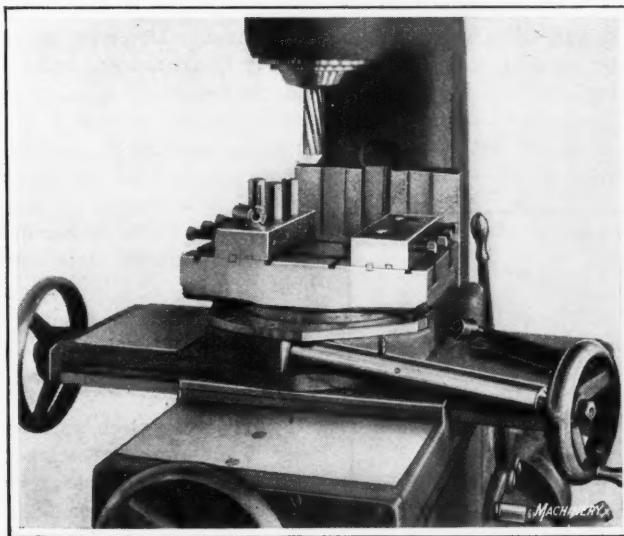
Slides, Swivel, and Vise of Die-sinking Machine; this View also shows Collets for holding Tools
